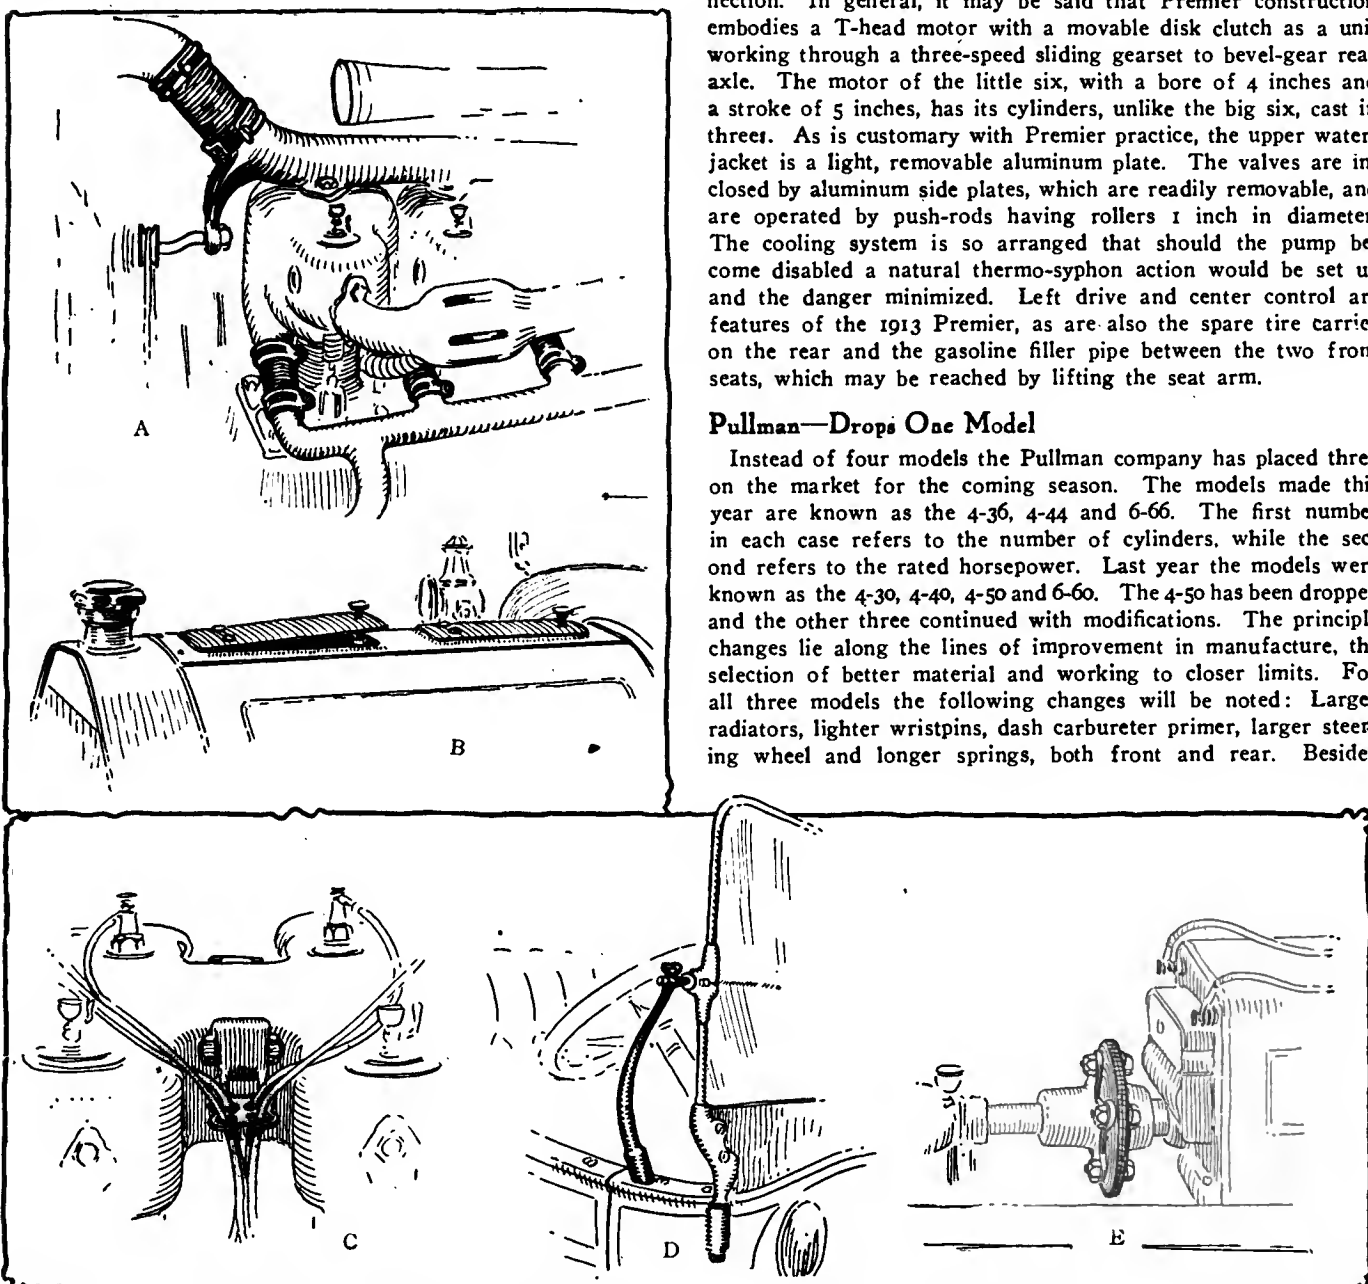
A, Maxwell rubber water manifold connections; B, Pierce hood cover plates; C, Pullman wire clip; D, Peerless windshield bracket; E, Pierce leather-disk magneto drive coupling
